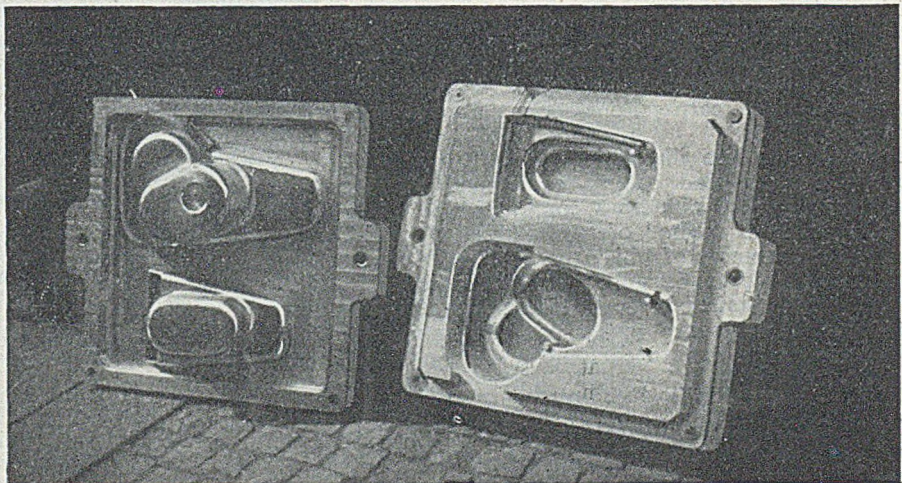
Fully-Machined Gear-case Pattern Equipment, Produced by Lathe and Universal Milling Machine only.
